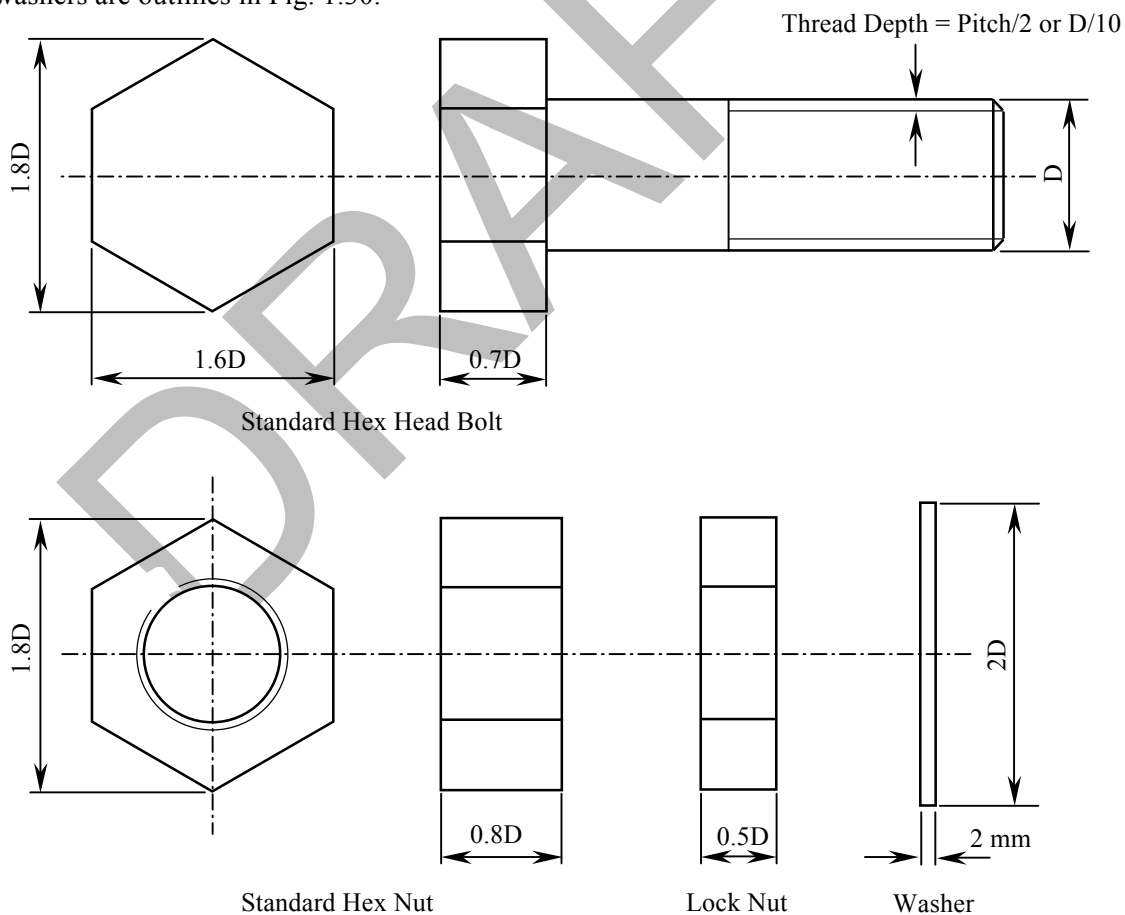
AS1100 standard dimensions for screw thread representations. Note that the washer's thickness drops to 1 mm for thread diameters below 8 mm. Pitch/2 is the preferred way to calculate the thread depth.
